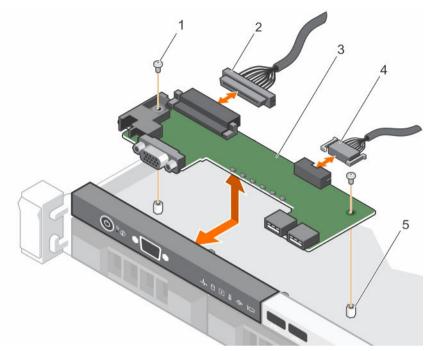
Removing and installing the LED control panel board—four cabled hard drive chassis
